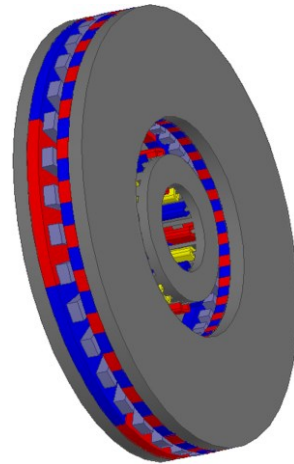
Proposed Compact Axial Flux Magnetically Geared Machine Topology
